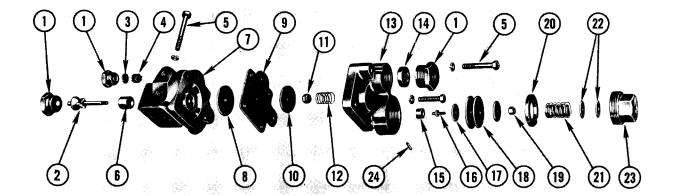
EMERGENCY VALVE, EXPLODED
